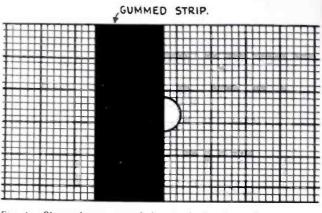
Shows how square holes can be layed out by the use of graph paper, ruled in divisions of about one millimeter (.039 inch).
